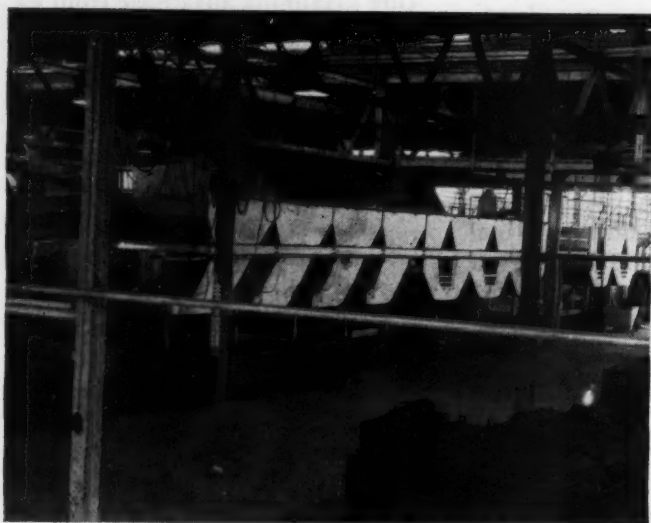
Hoppers receive castings for grinding operation from the paralleling elevated endless belt conveyor.
